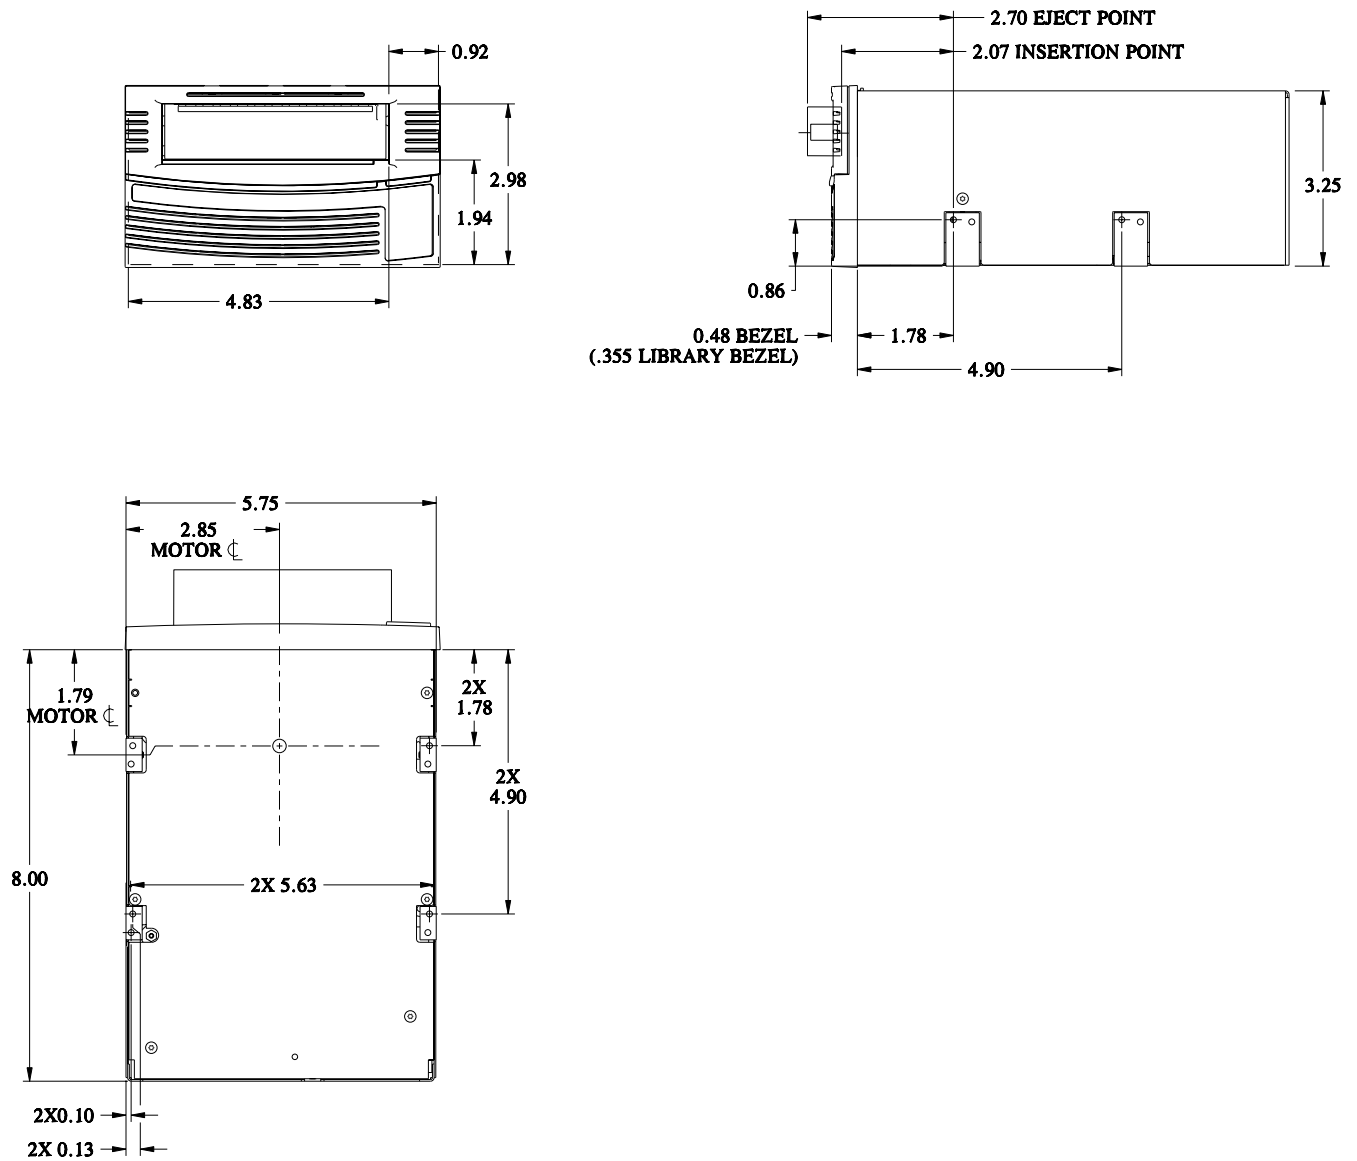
Internal Tape Drive Mounting Locations – Front, Side, and Bottom Dimensions
